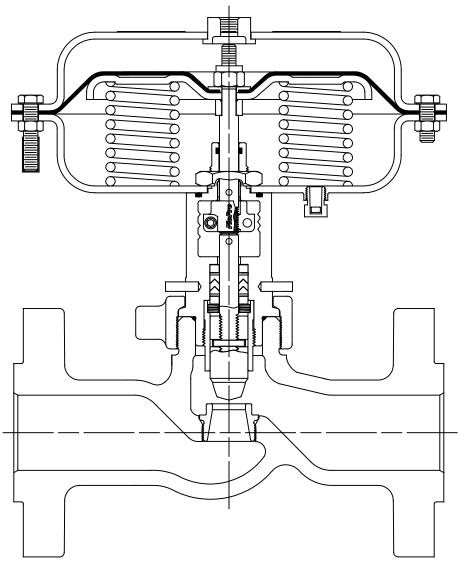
Fisher D3 Control Valve with Size 30 Actuator and NPS 2 Flanged Valve Body (Spring-to-Open Configuration)
